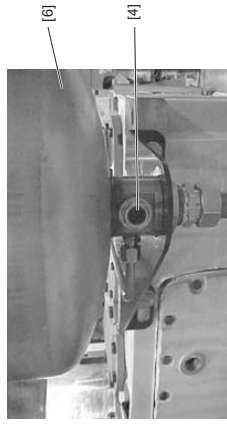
MC.PV./MC.RV., industrial gear units with steel oil expansion tank
